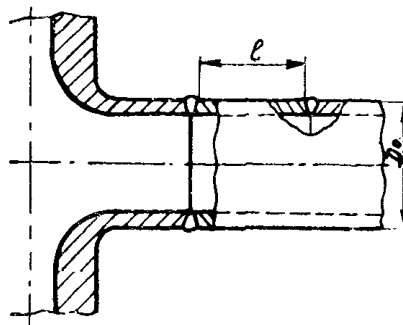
Arrangement of welds in welding pipelines to the branch,
